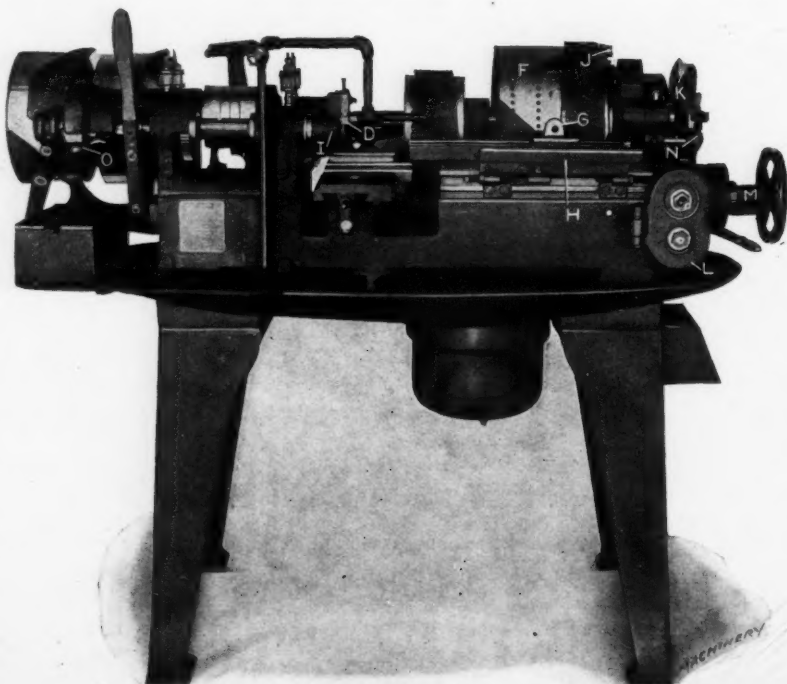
Model G Cleveland "Automatic" with Turret Mechanism removed
